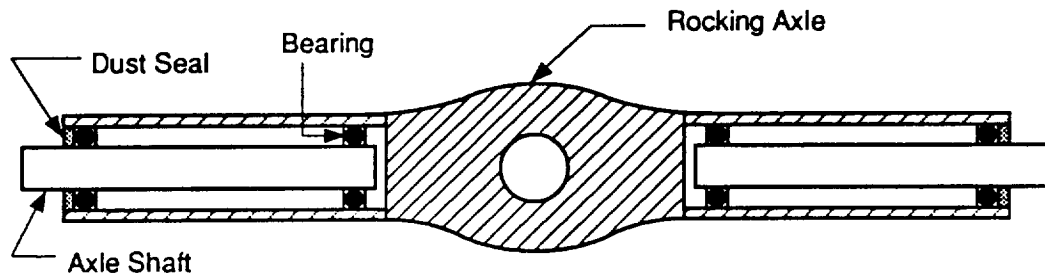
SECTION THROUGH ROCKING AXLE, FRONT VIEW
